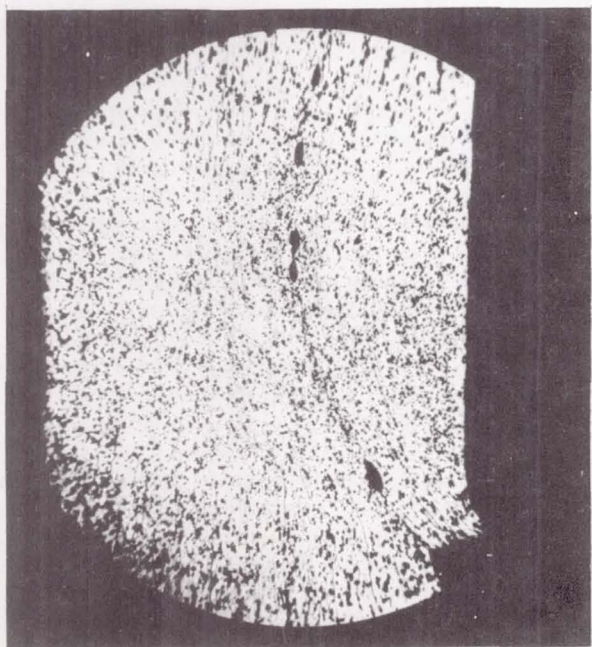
Higher Magnification of Weld Shown in Figure 11
